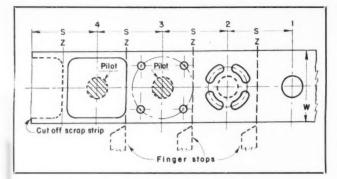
Scrap strip of a four-station die layout for producing the perforated blank shown in the sketch Fig. 3.
